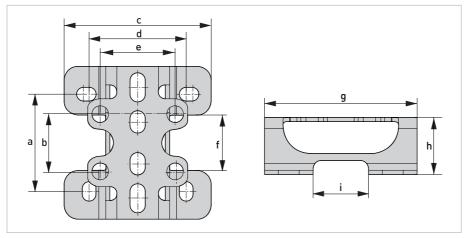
Mounting bracket (pipe and wall mounting 2" / 50.8 mm)
